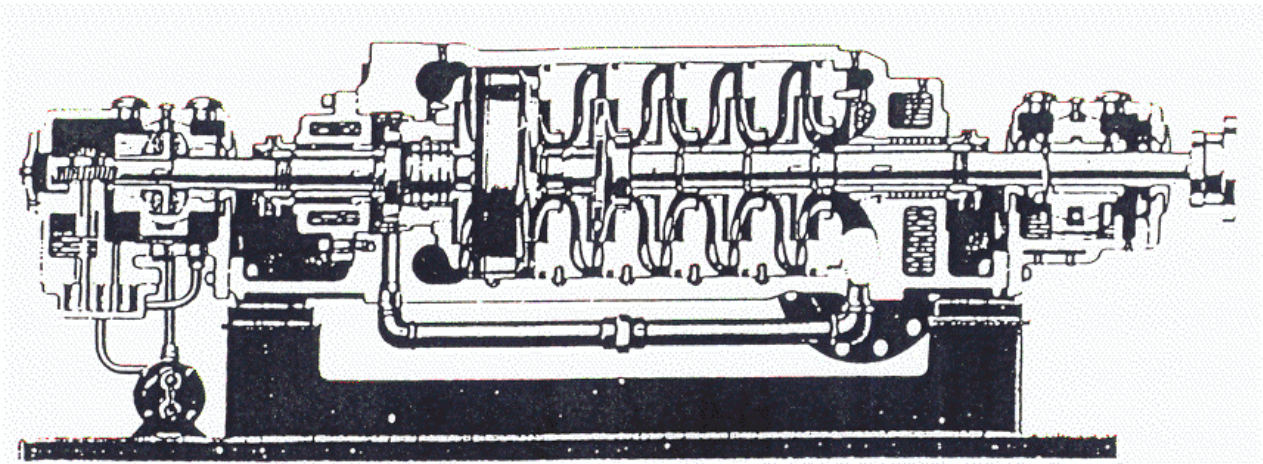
Multistage pump with single-suction impellers facing in one direction and hydraulic balancing device
